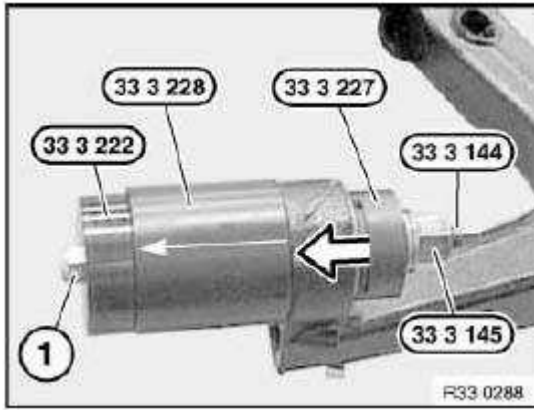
Special Tool (33 3 228), (33 3 222) And (33 3 144)
